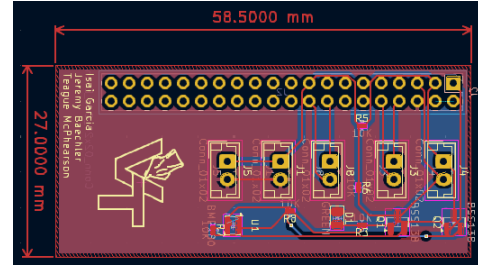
Custom PCB Layout (Small PCB Adaptation)
